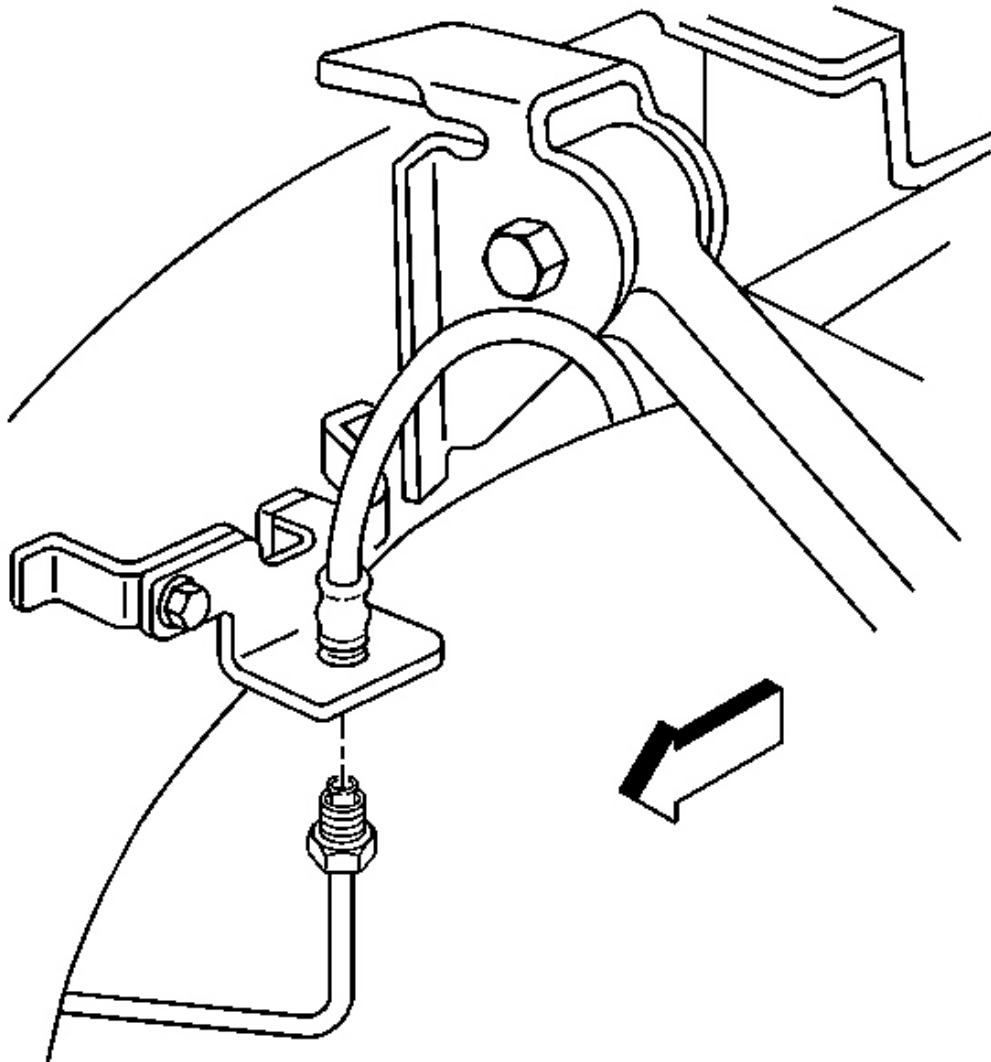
Rear Tire And Wheel Assembly & Brake Pipe Fitting End
